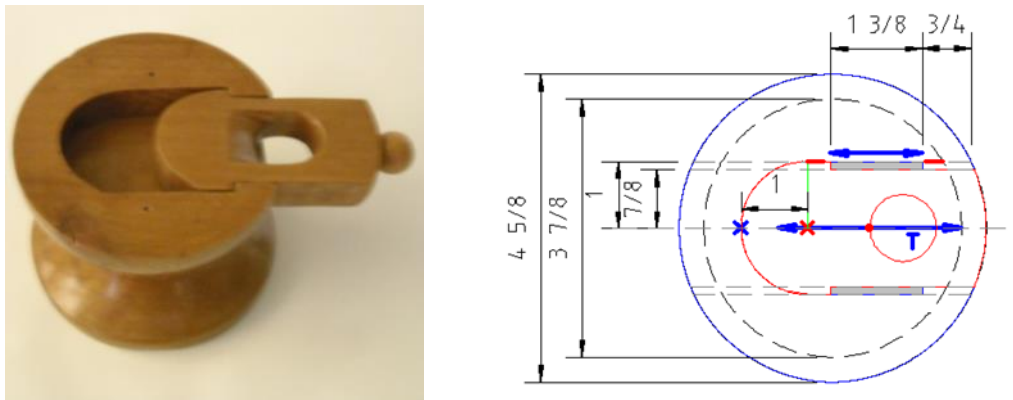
Photograph and Diagram of a Dispenser Mechanism.
